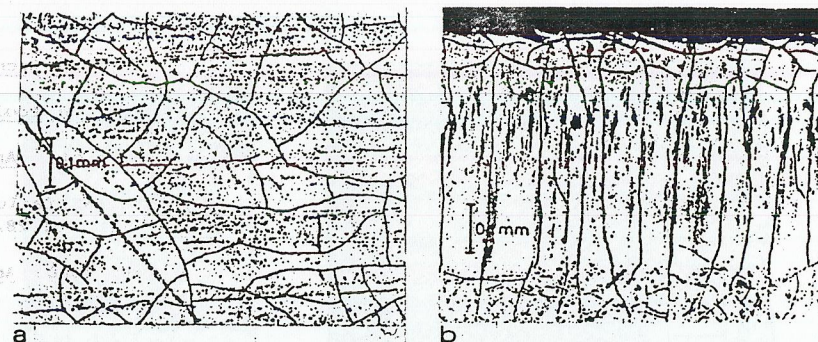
(a) Cracks on a TiC Coating on a WC substrate. (b) In the chip-tool contact area these cracks realign into comb cracks in the crater and into transverse cracks at the cutting edge. The latter cracks are easily removed during a subsequent cut.
